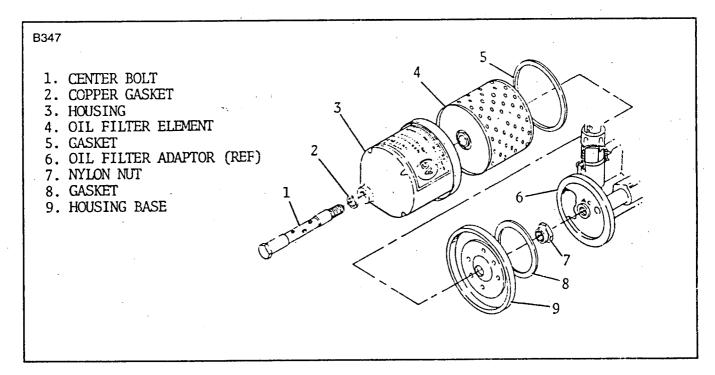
Oil Filter Assembly (Refer to Figure 79-4 for Spin-on Filter)
